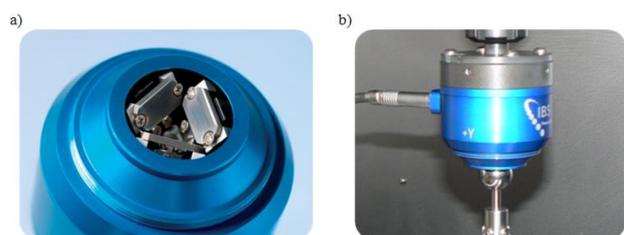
R-Test - CNC machine tool diagnostic system:a) MT-Probe measuring head, b) Master ball and measuring head
